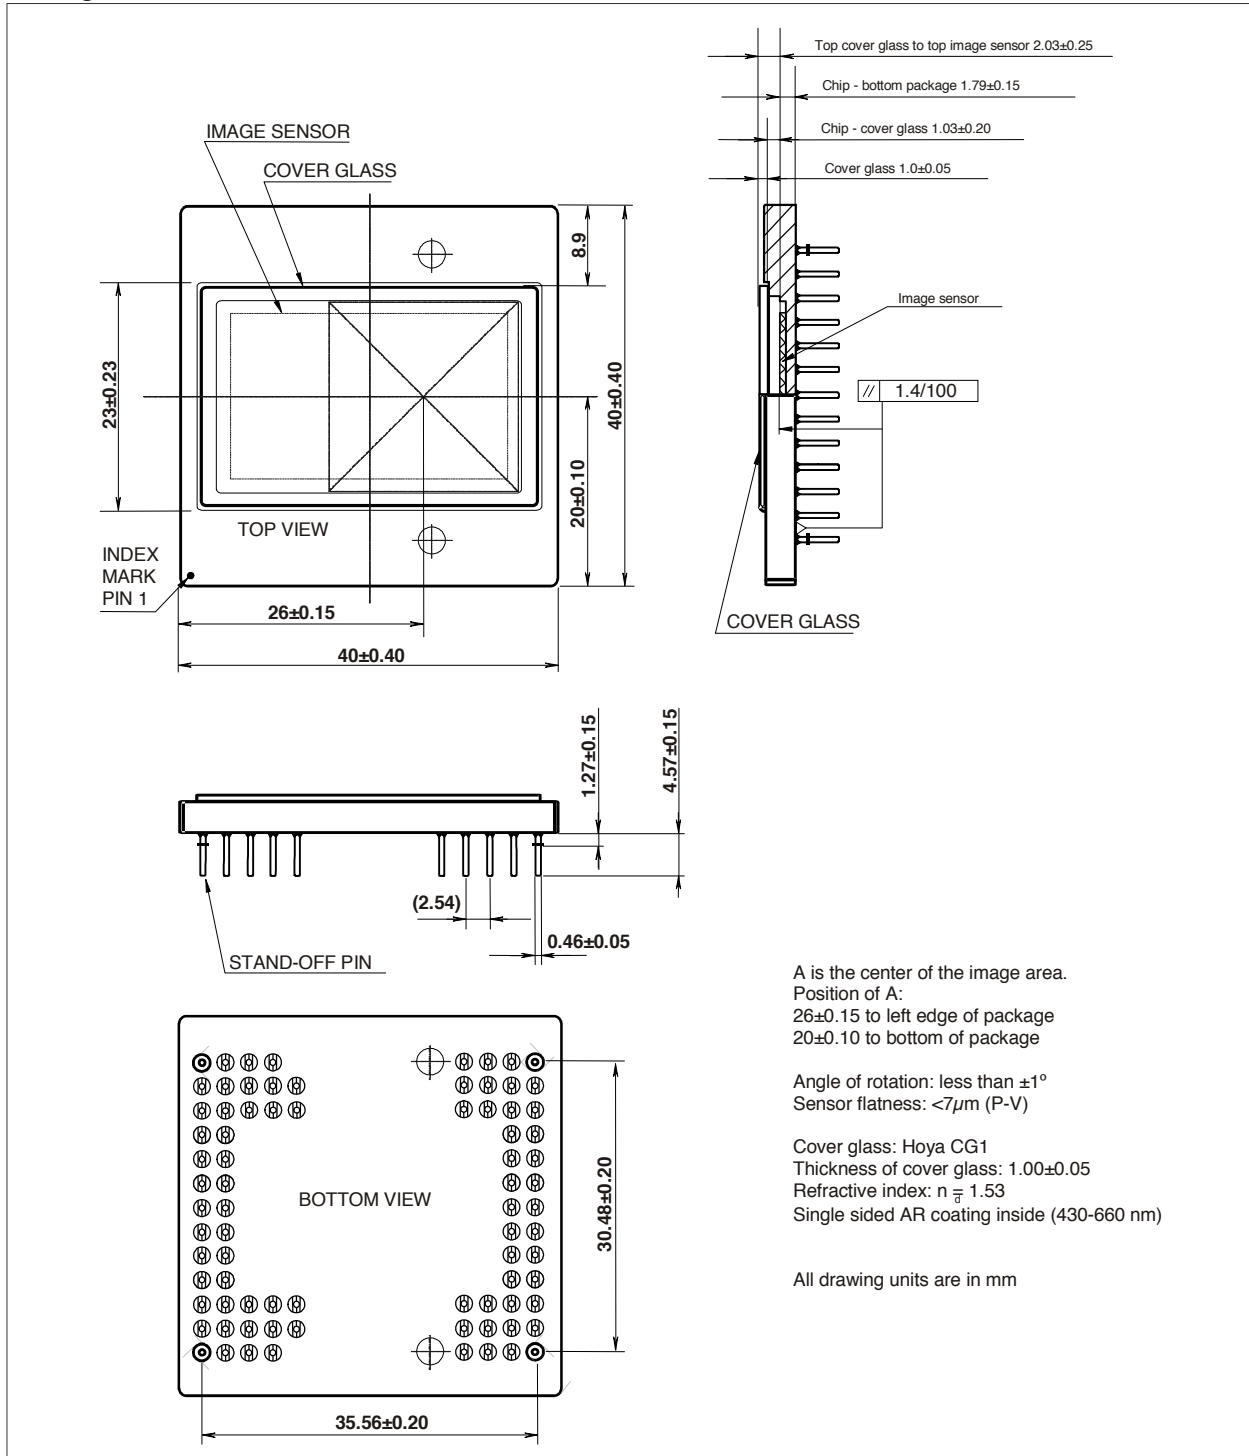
Mechanical drawing of the PGA package of the FTT1010M
